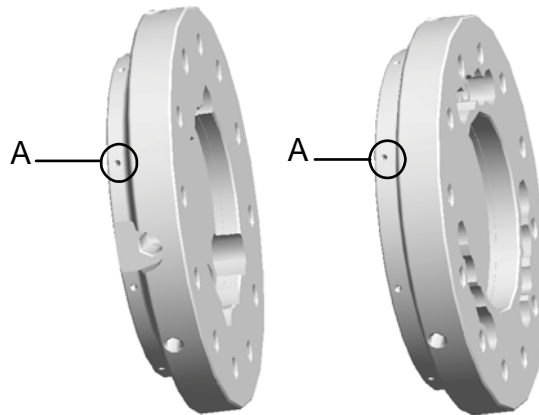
Seven holes (A) on a radius of x mm from axis 6 center on the two standard tool flanges.
